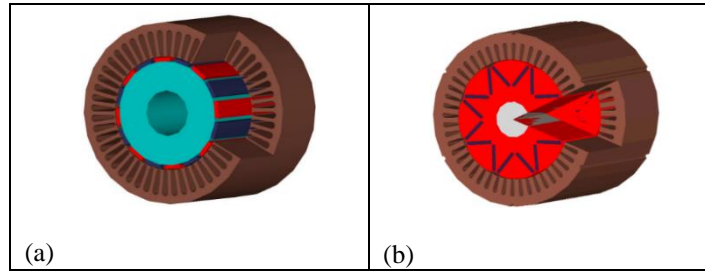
Structure of External Stator and Internal Rotor (ES-IR), (a): to internal rotor structures with surface mounted magnets, (b): buried magnets
